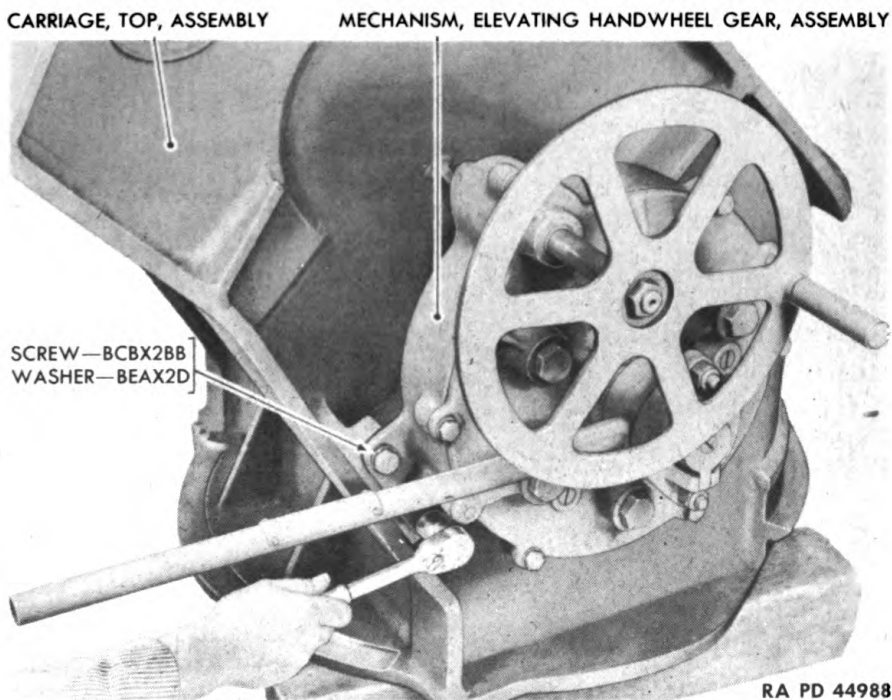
Removing Screws from Elevating Handwheel Gear Housing
